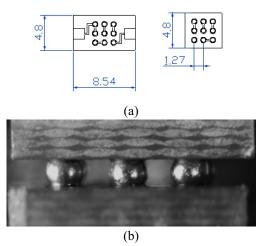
(a) Specimen dimensions (mm) and (b) reflowed solder shape
